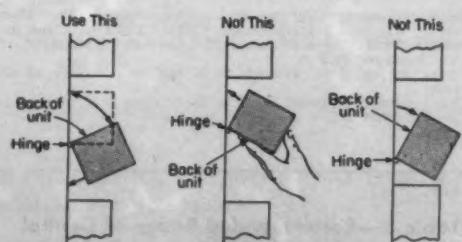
Install hinge-mounted units to open full distance and remain open without being held.
